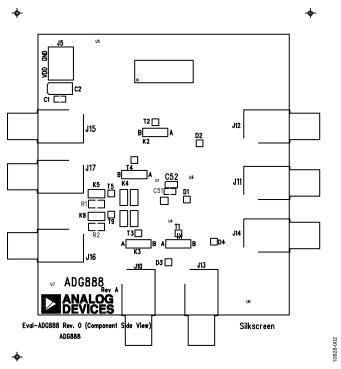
EVAL-ADG888EBZ Evaluation Board, Component Placement Drawing
